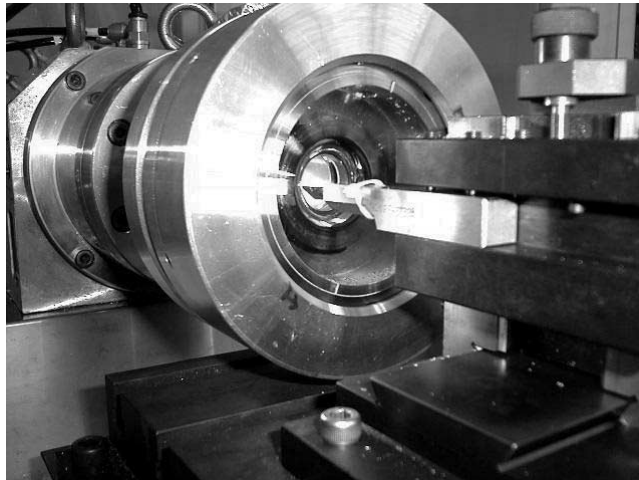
Photograph of fine manufacturing of the rf-gun cavities at KEK machine shop.
